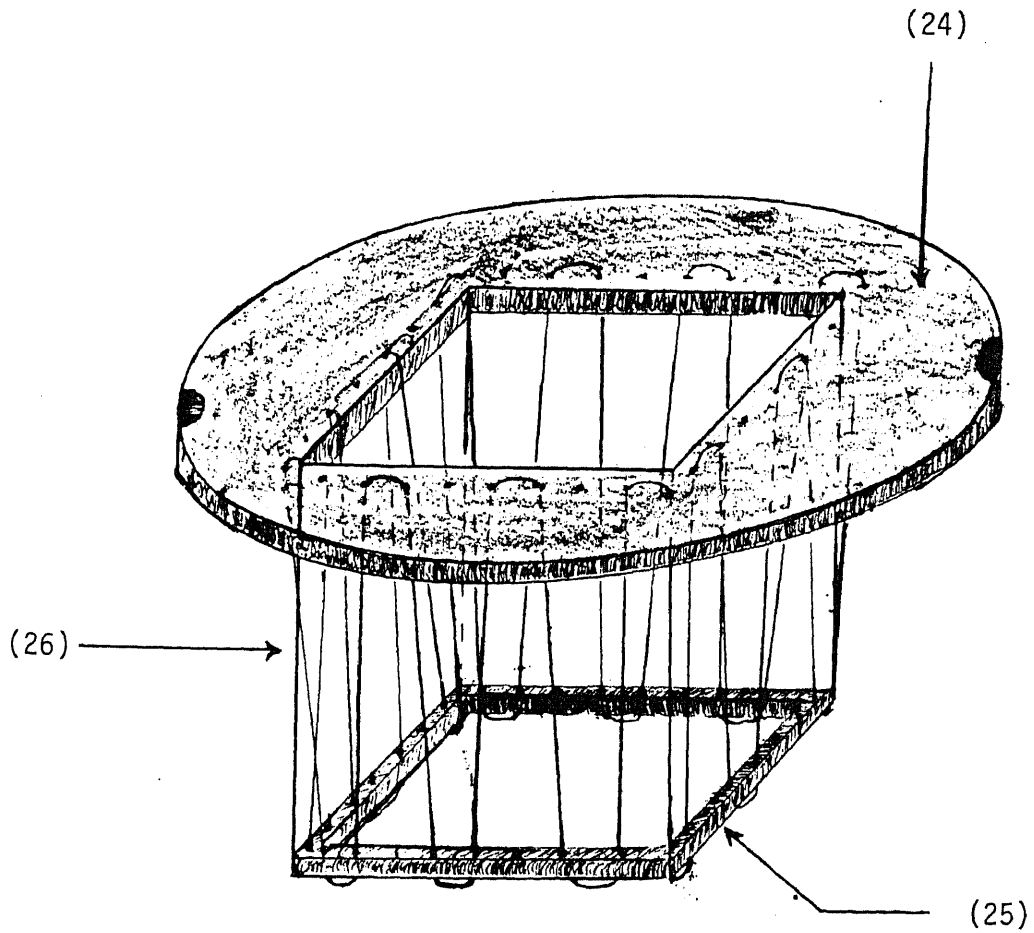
Three dimensional view of the Anode of the Ionization Assembly.
